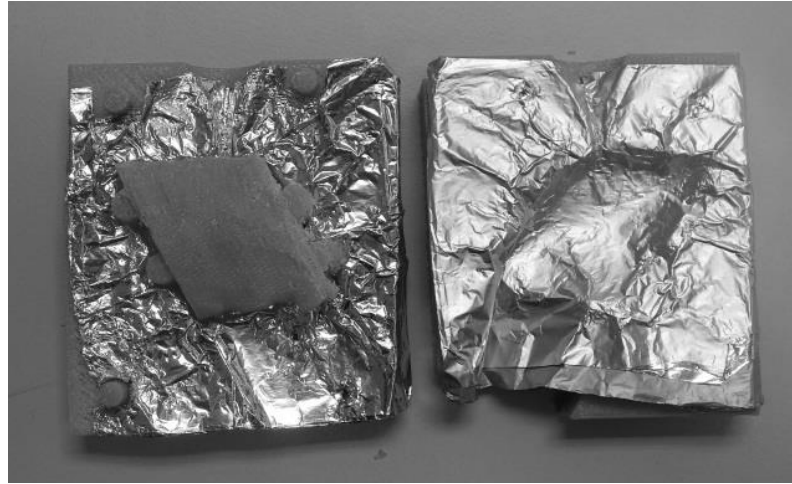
Aluminium foil as pressed into the cavity of the AM mould.
